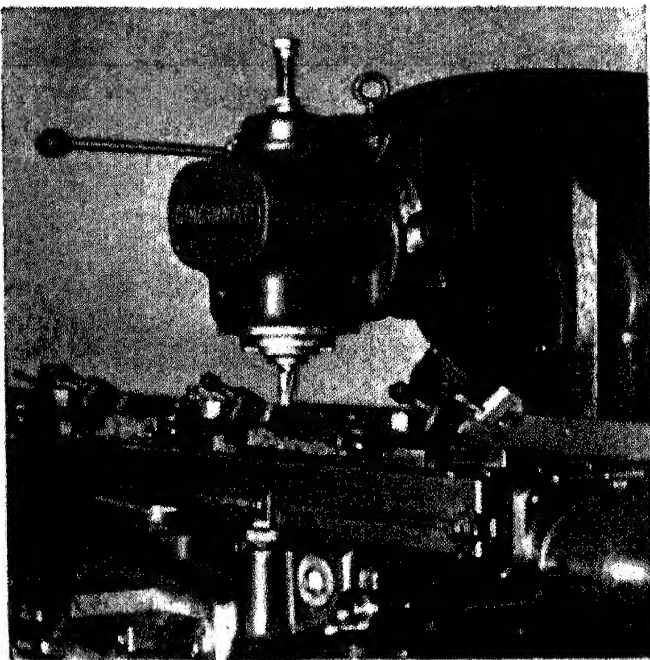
A vertical milling attachment. (Courtesy The Cincinnati Milling Machine Co.)
